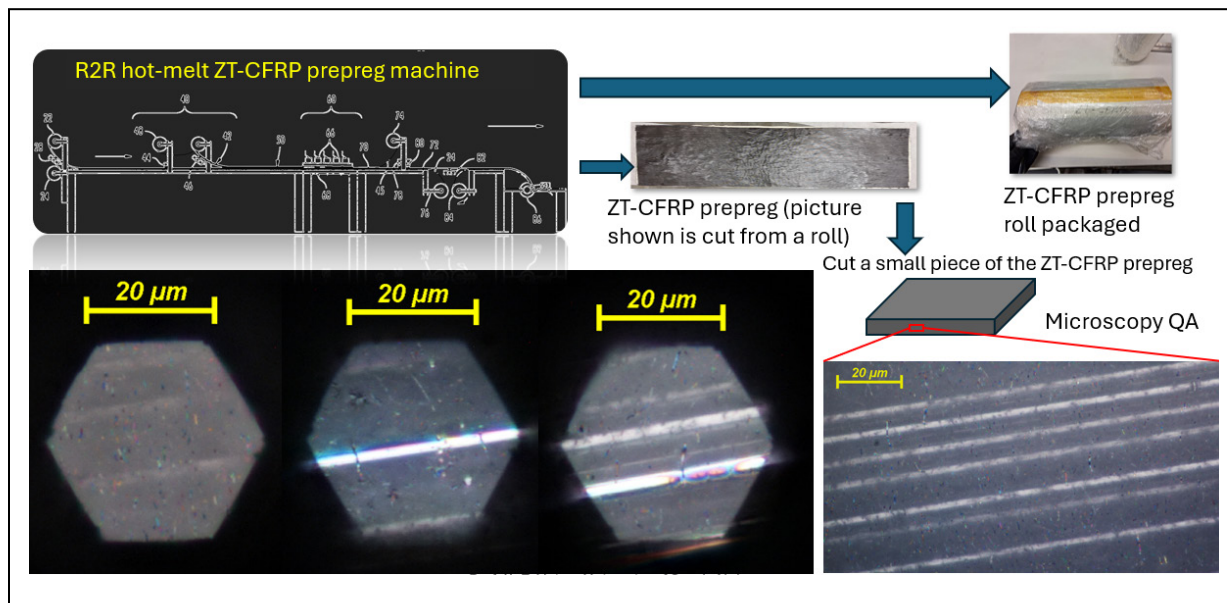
Automated roll-to-roll hot-melt prepreg machine has been used to spool out ZT-CFRP prepreg. The z-threading morphology has been validated with microscopy analysis.
